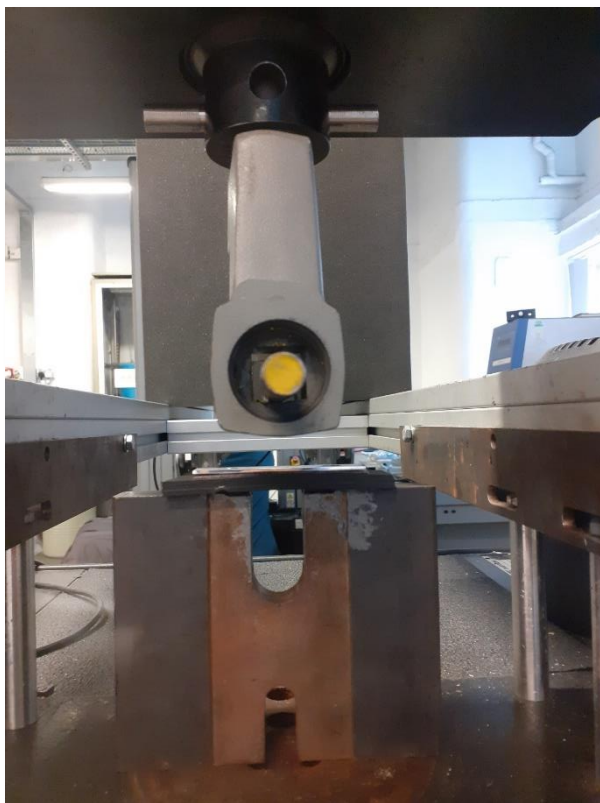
Experimental setup to impress the pre-shape to the specimens.
